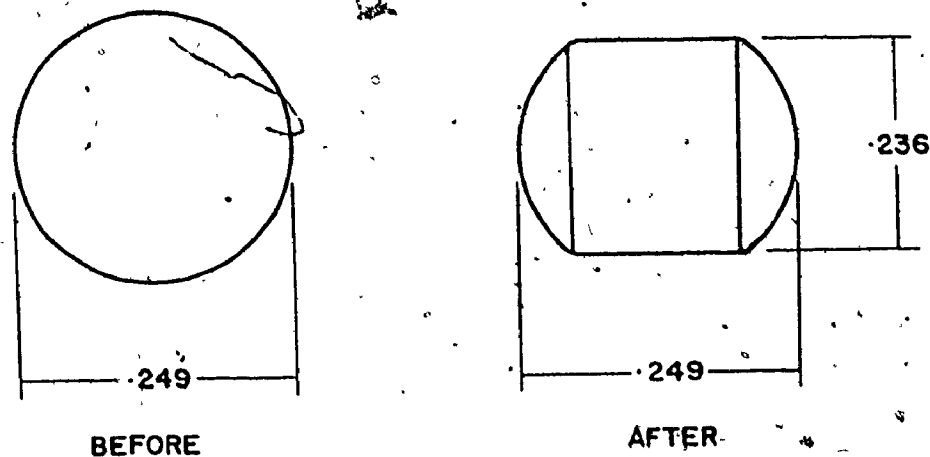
Illustration of Ball Bearings Before and After Failure
